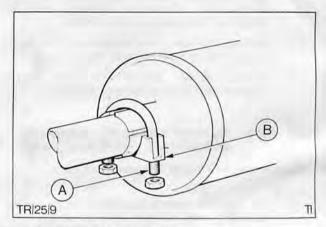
Typical 'U' bolt clamp joint A – 'U' bolt B – Clamp
